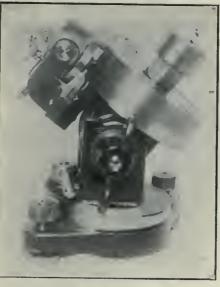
DIVIDING HEAD FOR USE ON ENGRAVING MACHINE.
